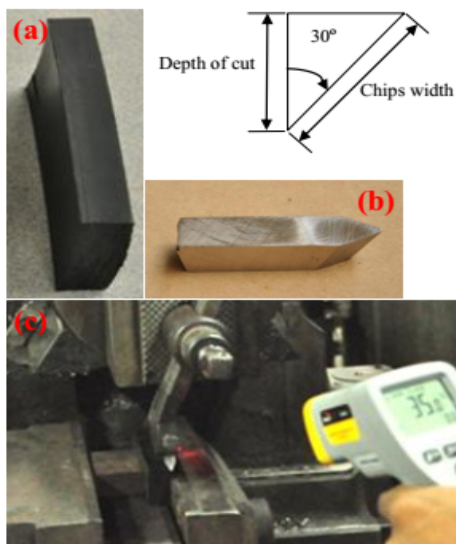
(a) Experimental HDPE sample, (b) HSS cutting tool and (c) Experimental shaper machine
